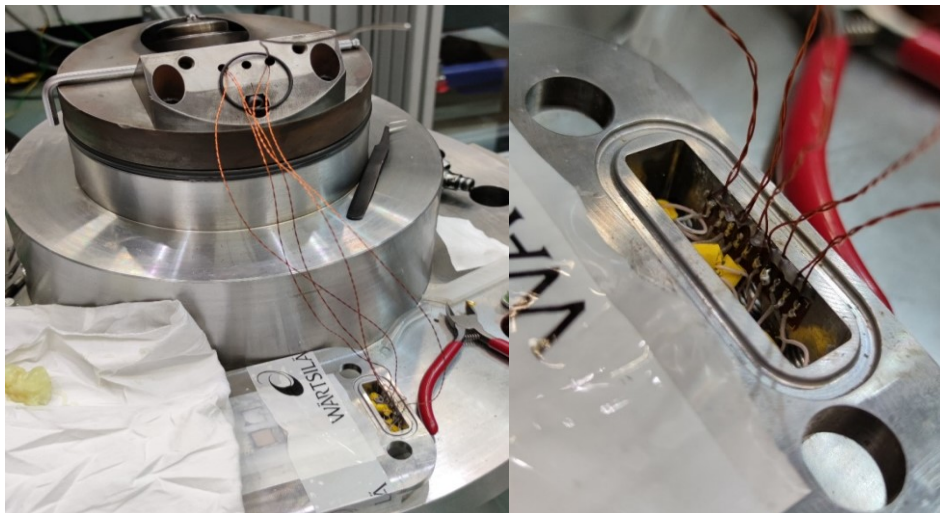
Soldered sensor wires to the soldering terminal and cable routes out of the OSCC.
